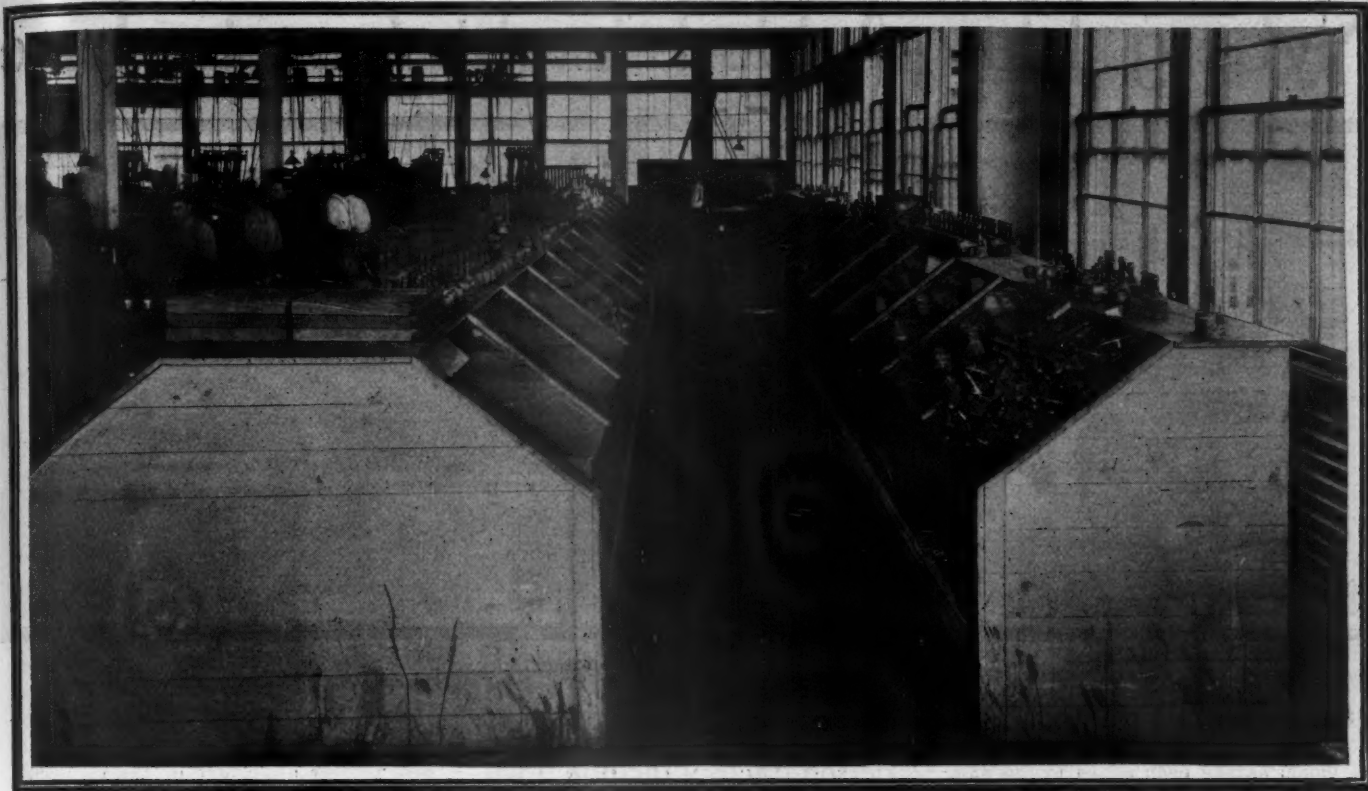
SURPLUS PARTS' BINS IN ASSEMBLY ROOM OF WHEELER & SCHEBLER CARBURETER FACTORY
